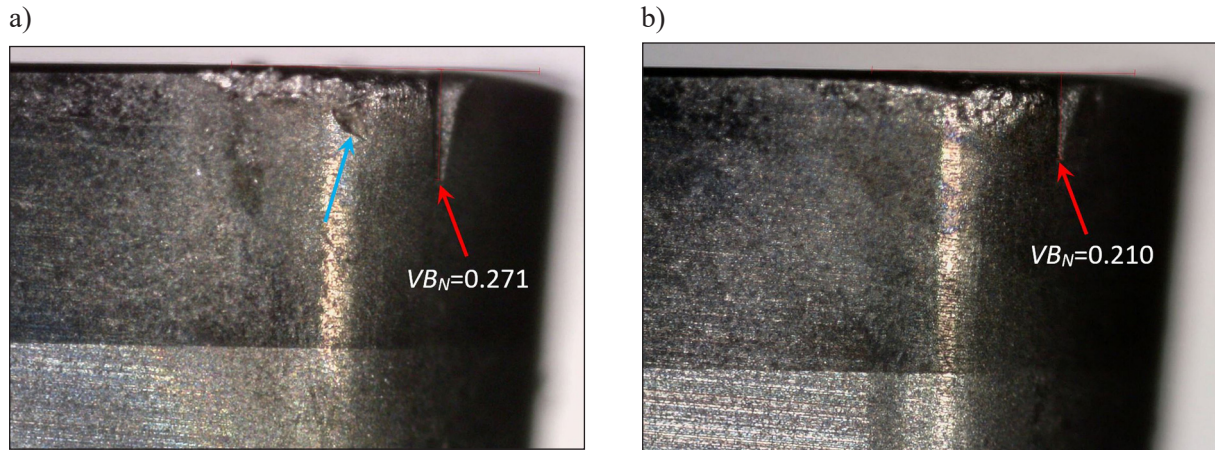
Cutting tool wear CH0620 at the end of test a) P1, b) P2 – clear prevailing notch wear – red arrow and traces of chipping on the P1 insert – blue arrow
